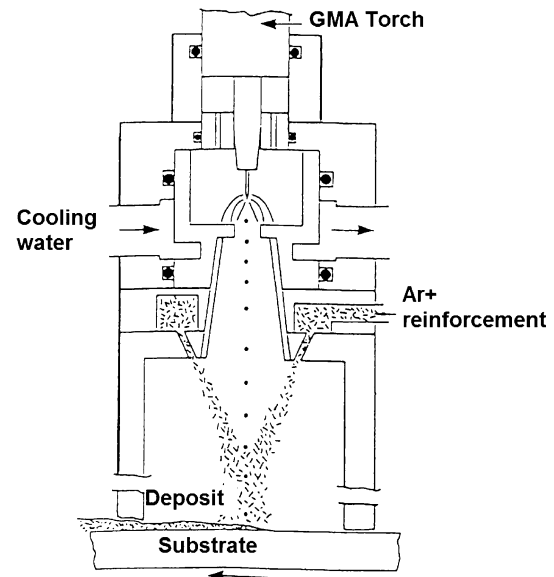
A schematic of the modified gas metal arc welding deposition process [141]
